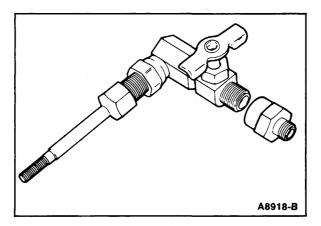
T83T-9000-A Fuel Transfer Pump Pressure Adapter
